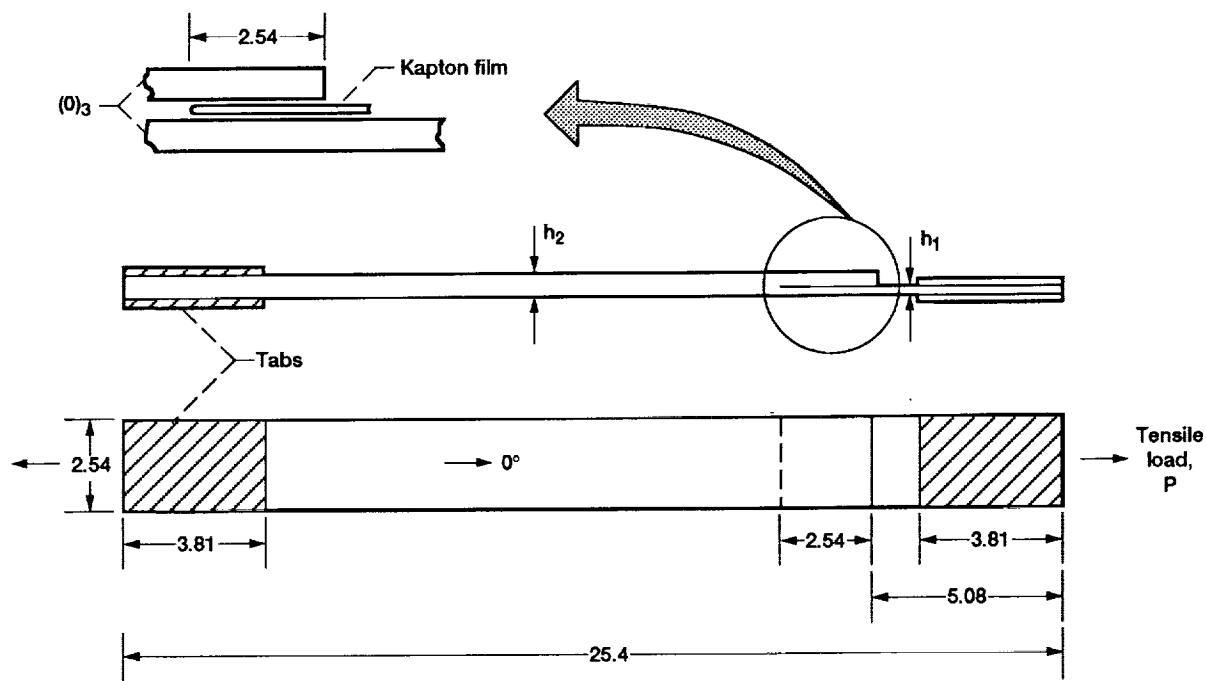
Cracked-lap shear test specimen (adapted from ref. 50); all dimensions in centimeters.
